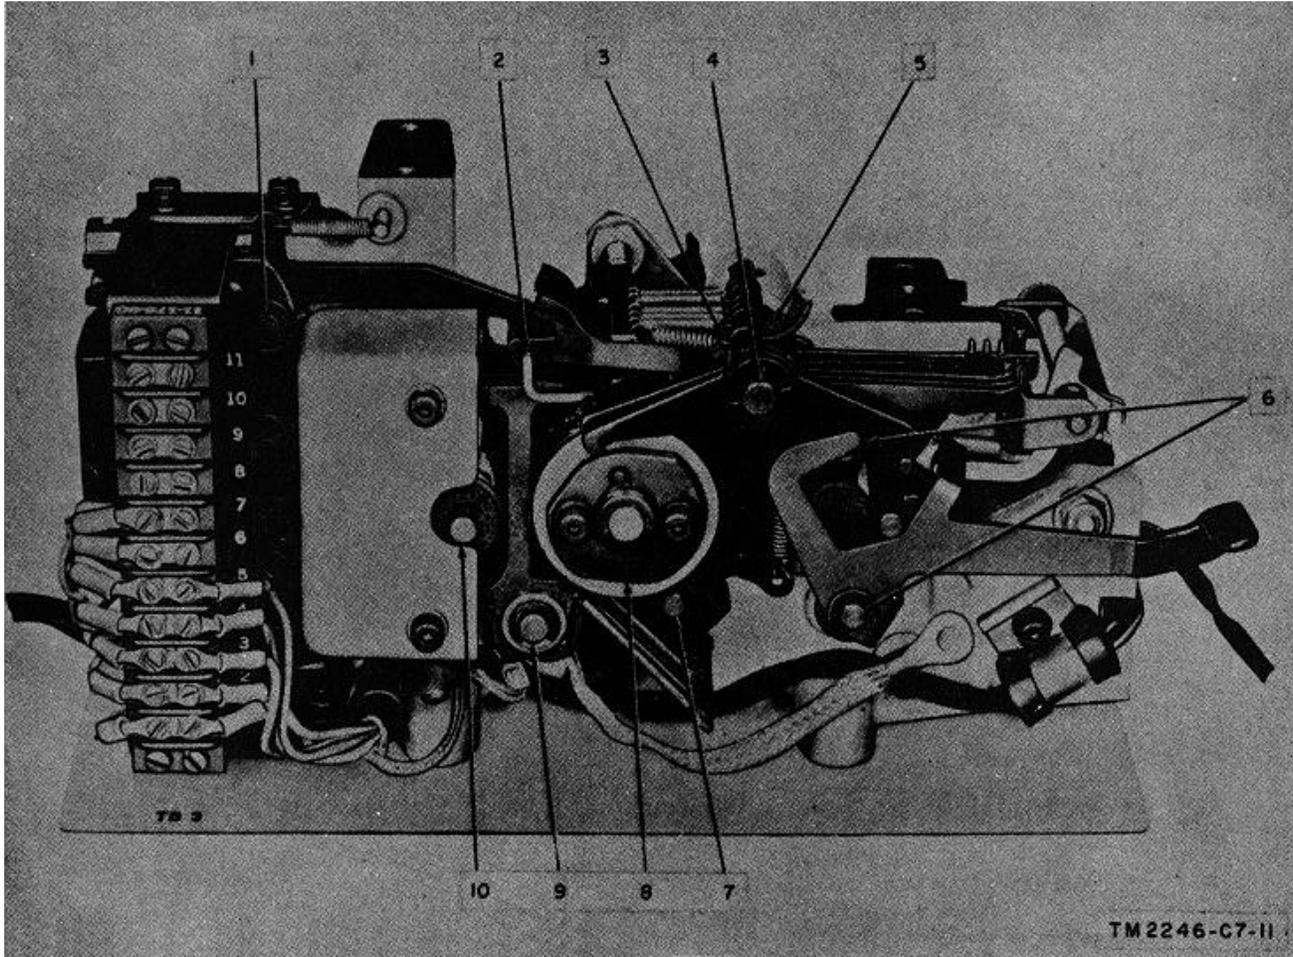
Right side of transmitter-distributor, showing lubrication points.
